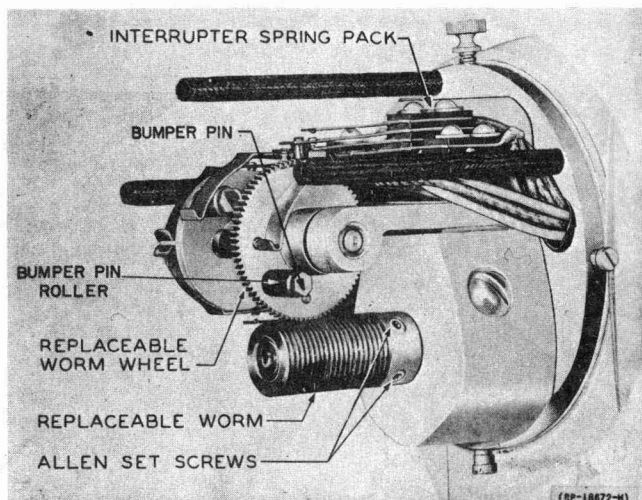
BUMPER WHEELS OF HOLTZER-CABOT
